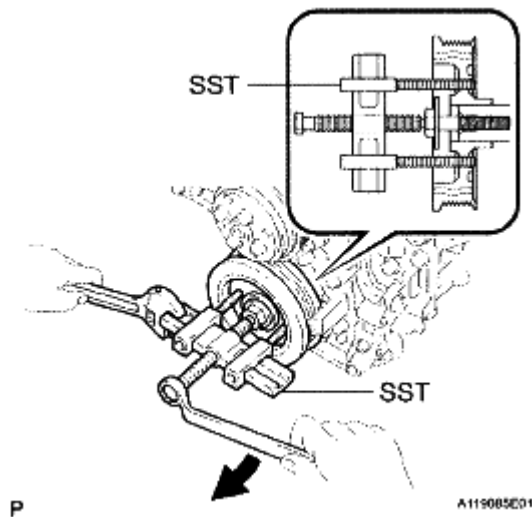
Using SST To Remove Crankshaft Pulley Bolt & Pulley
